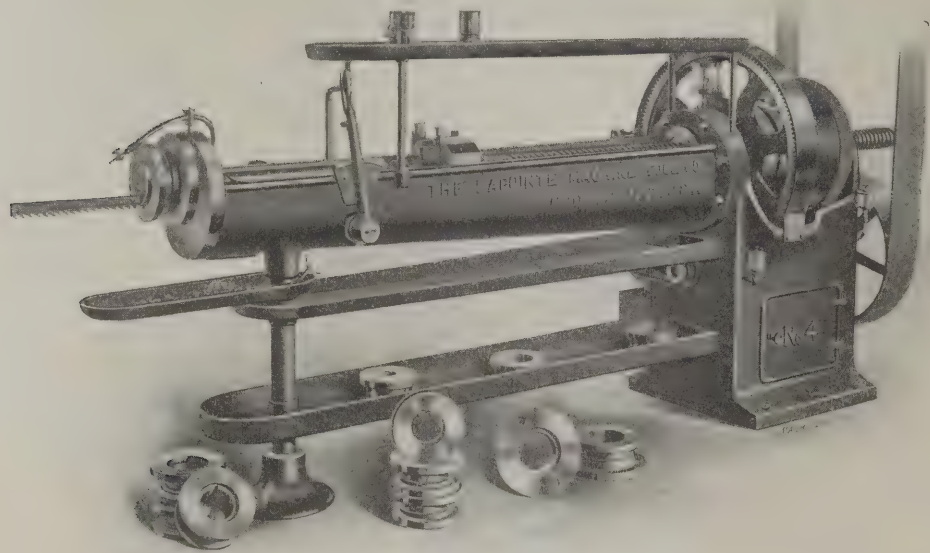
Heavy Broaching Machine, especially adapted to Automobile Work.
